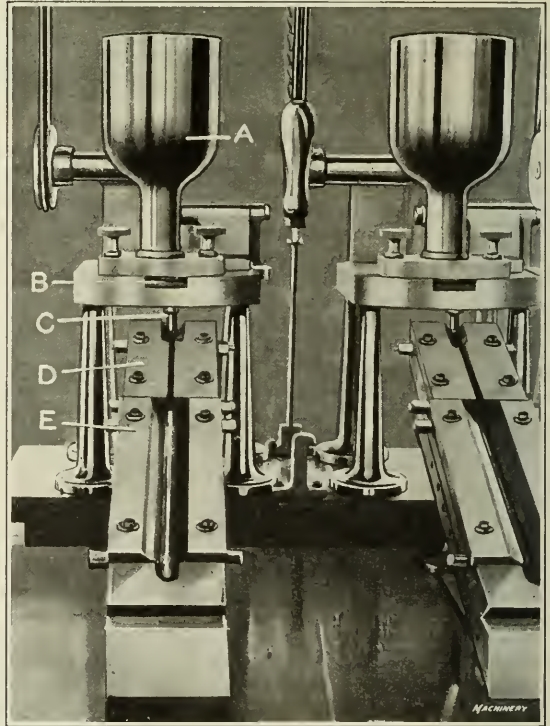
Automatic Ball Gaging Machine for inspecting Balls up to  $\frac{3}{4}$  Inch Diameter
